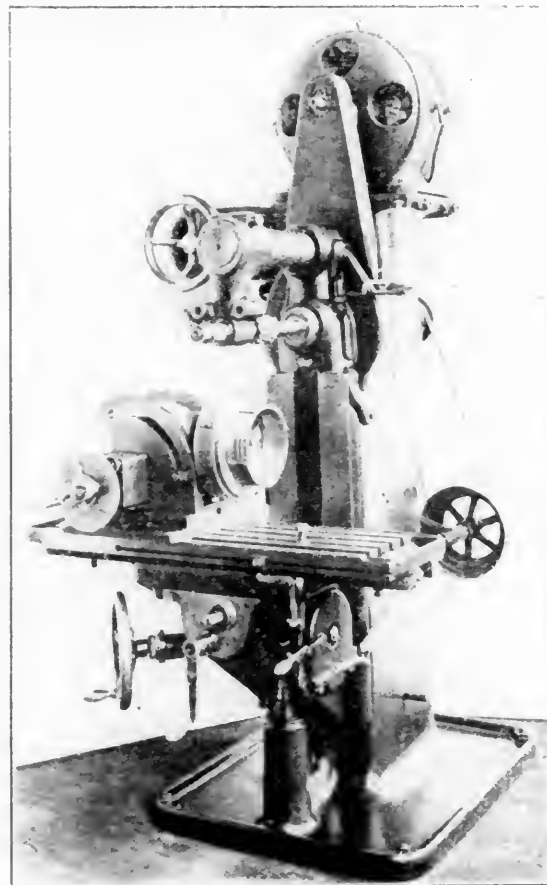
VARIABLE-SPEED DRIVE FOR A BROWN & SHARPE UNIVERSAL MILLING MACHINE.—ALL PARTS ENCLOSED.—CROCKER-WHITE MOTOR.
